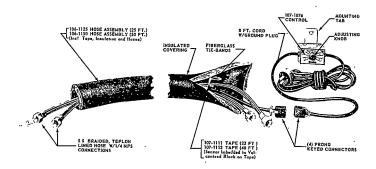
HOT HYDRAULIC OUTPUT HOSE ASSEMBLY (HEATED)
